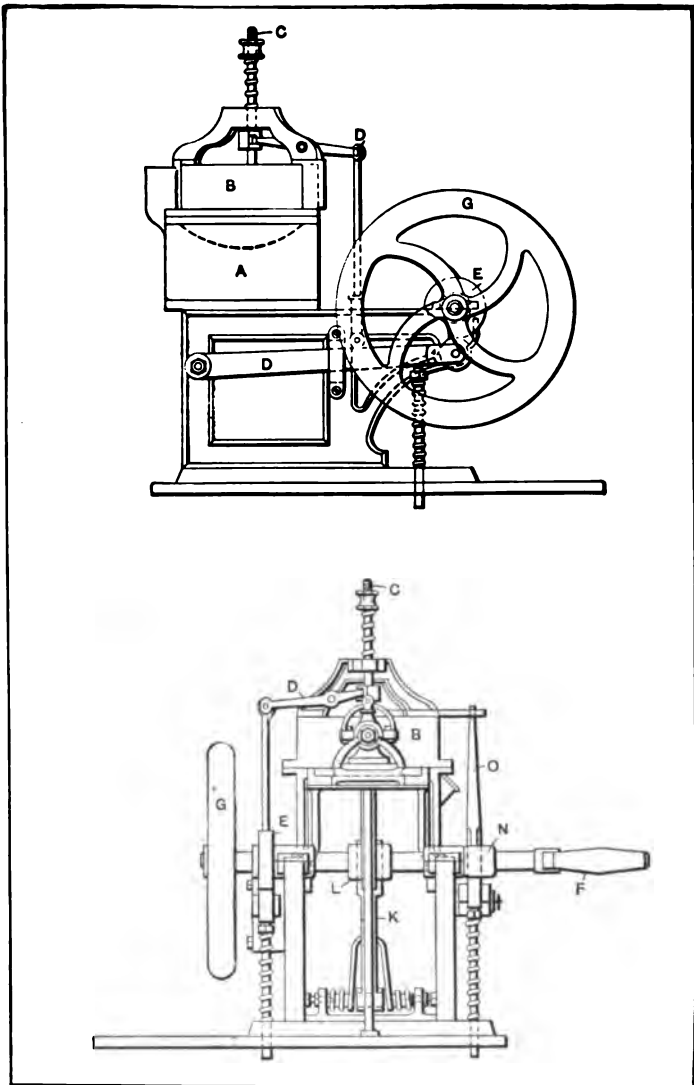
Side View and End Elevation of First Automatic Die-casting Machine
